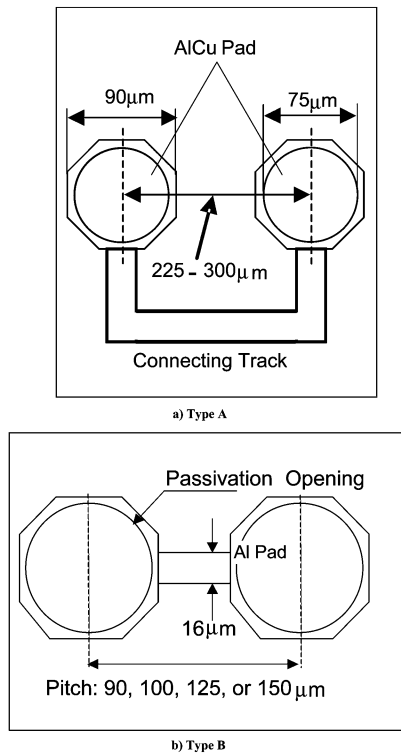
Details of test chip designs: pad pitch, layout, materials, and opening.
